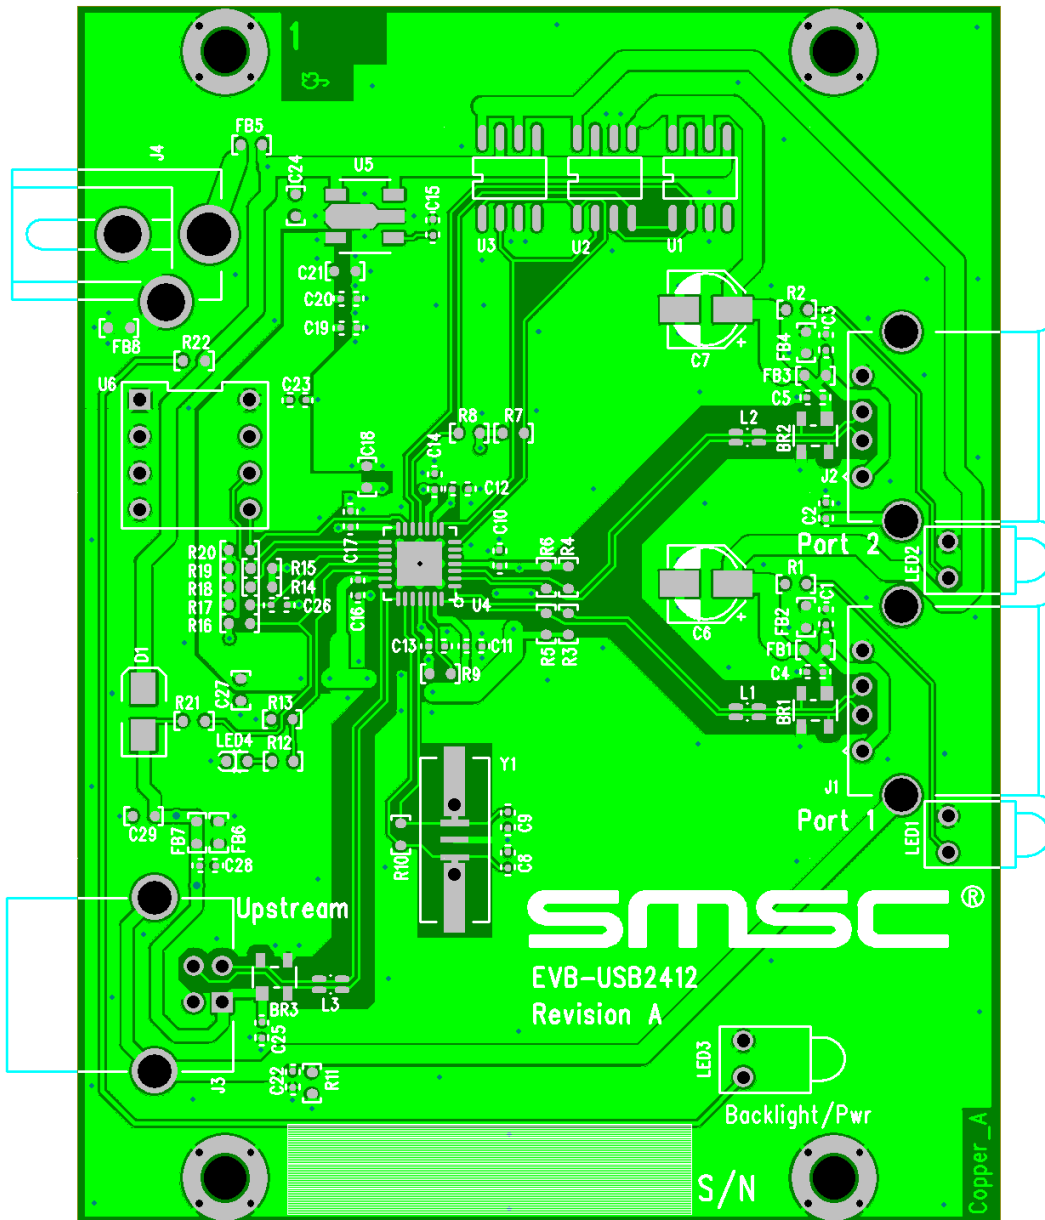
EVB-USB2412 Top Layer - Component Side
